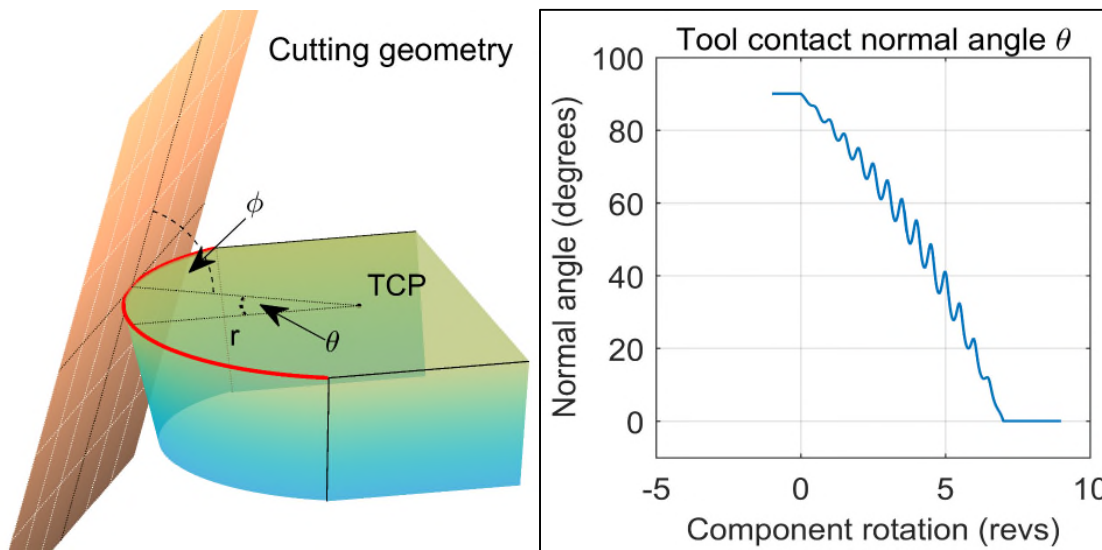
Selection of tool contact angle by workpiece surface slope – exaggerated feed pitch and eccentricity (right)
